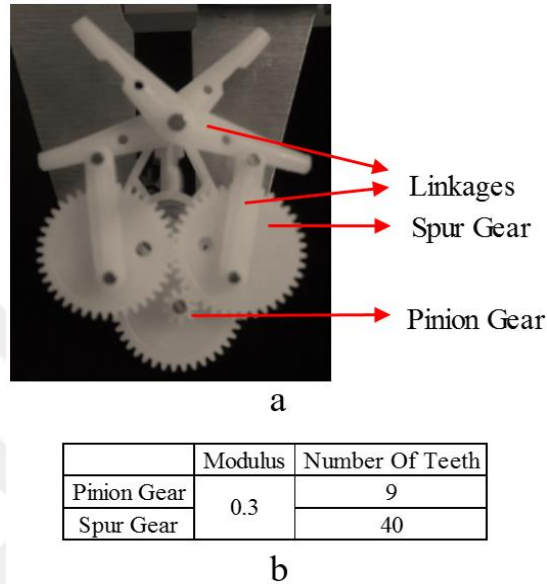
The utilized flapping mechanism a) Front view of the mechanism b) Properties of the spur and pinion gear
